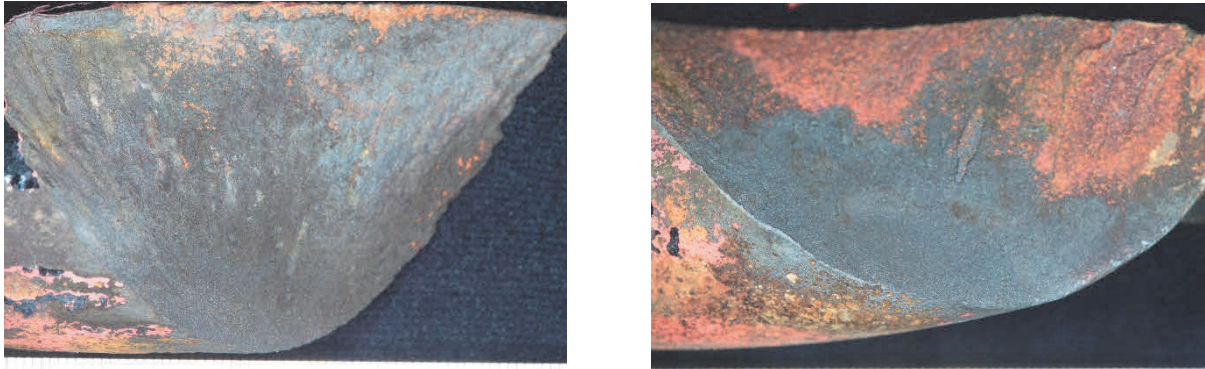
Close-up of the cleansed fracture surfaces (a) No. 1490 and (b) No. 1286
